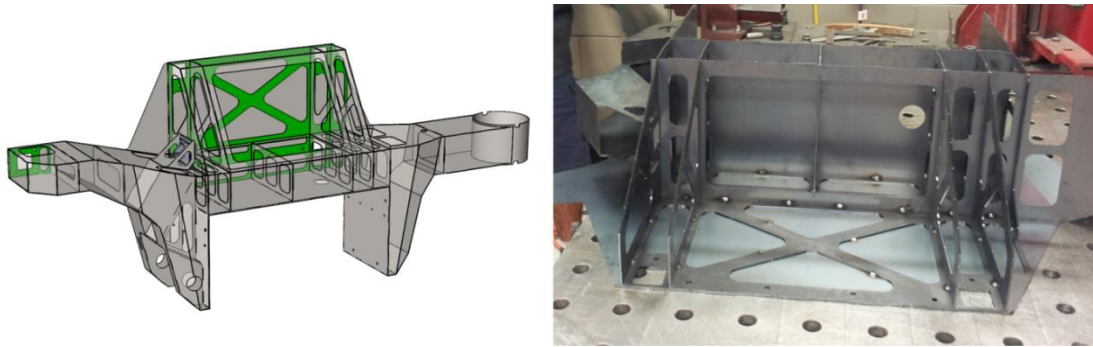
The internal supporting brace represented in the CAD file and as part of the side unit assembly during fabrication.
